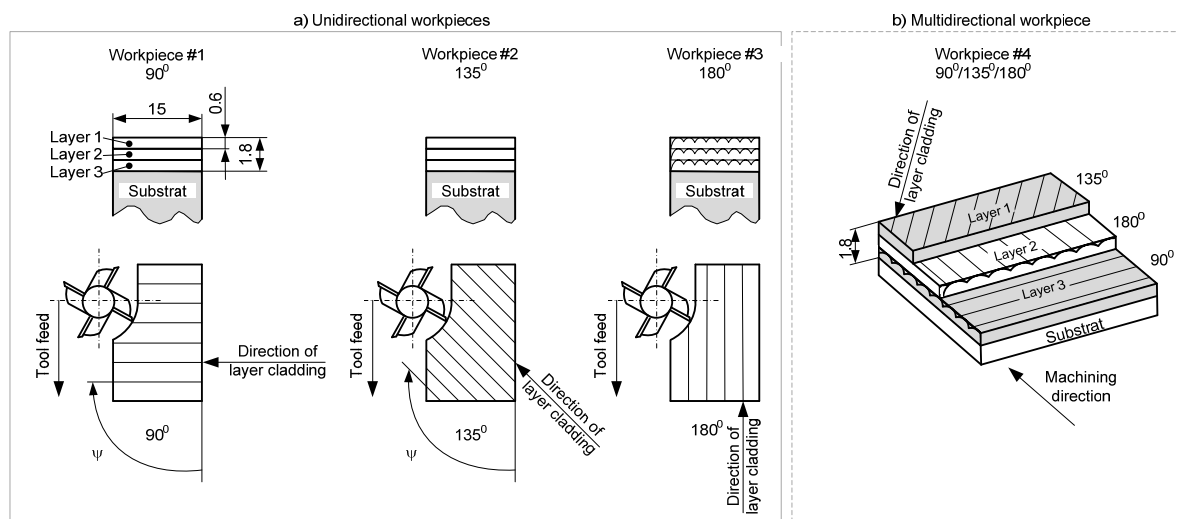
Structure and position of used unidirectional and/or multidirectional multi-layer workpieces in machining experiments
